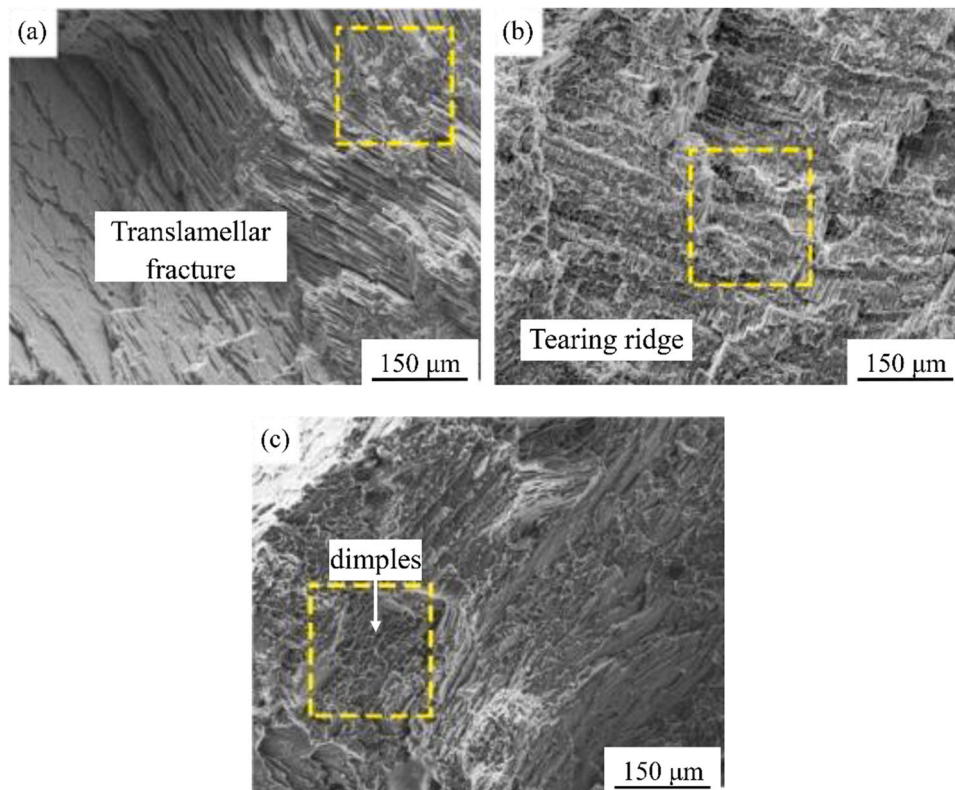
Fracture surfaces of  $\gamma$ -TiAl alloys after high-temperature tensile tests: (a) 700 °C, (b) 800 °C, (c) 900 °C (The BDTT is 750–800 °C) [69].
